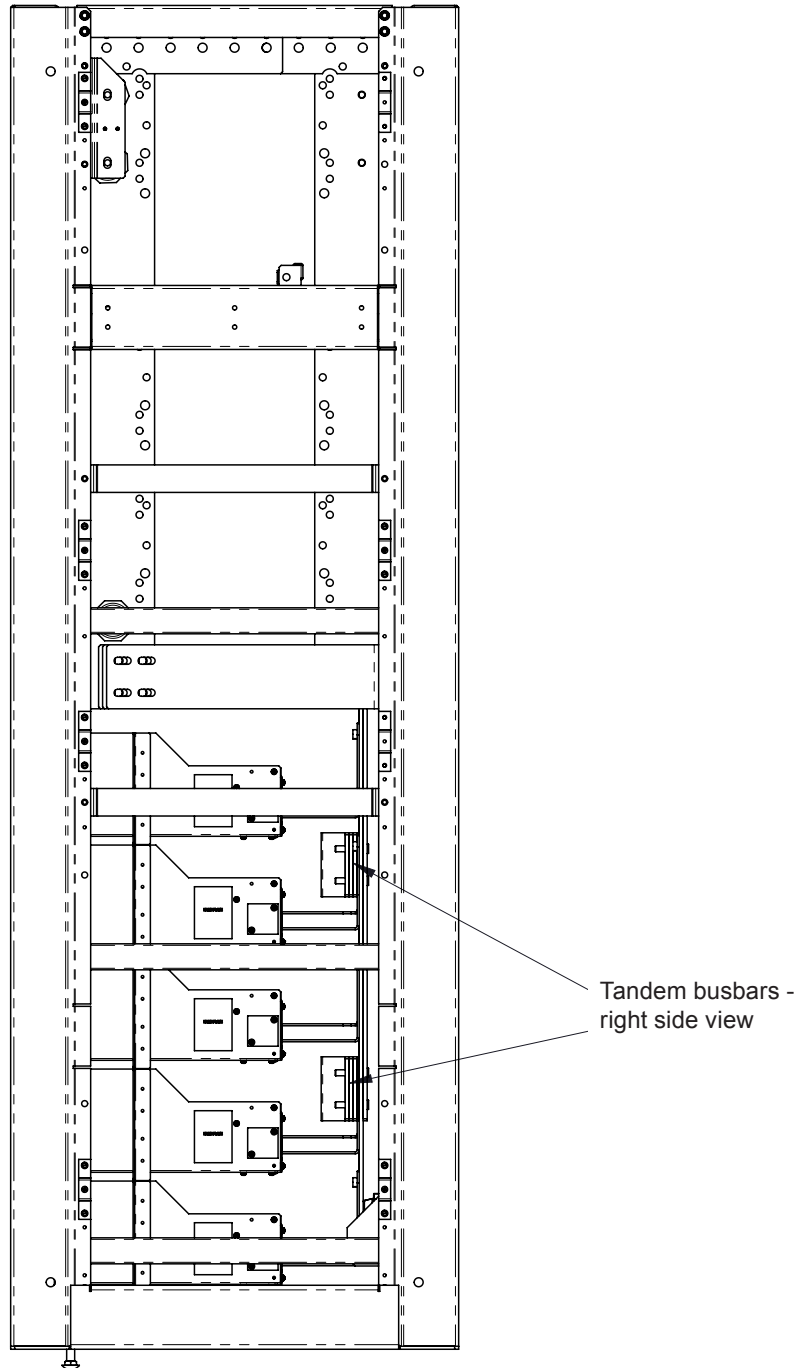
Tandem system busbar installation, bay shown with panels removed
